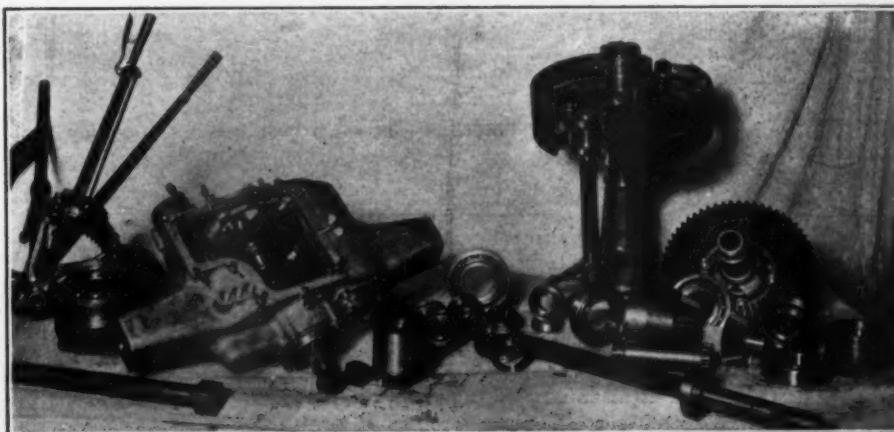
Gear box assembled and parts of rear construction. Note double-bevel wheel for fourth speed
